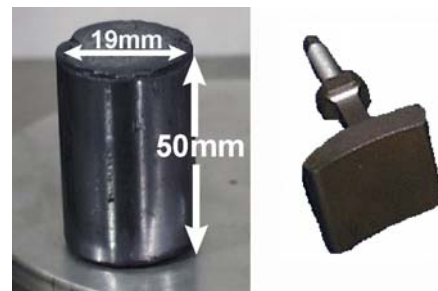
MoS₂ Pellet and TiC Bearing Pad
